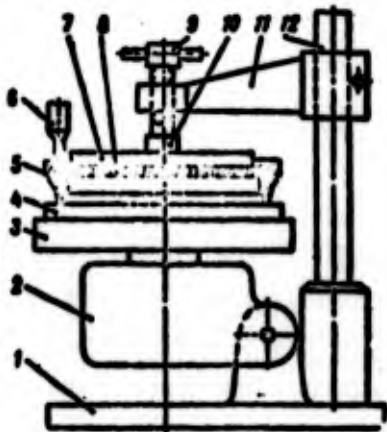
Installation for the welding of annular seams of the FG: 1 - bed, 2 - manipulator; 3 - face plate; 4 - support element; 5 - power ring; 6 - welding head; 7 - disk; 8 - base; 9 - screw; 10 - pivot; 11 - cantilever; 12 - column.
